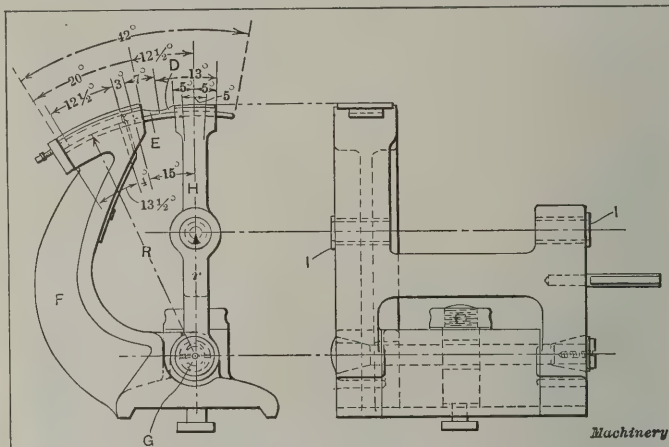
Construction of the Caliper Rest shown in Figs. 43 and 44
